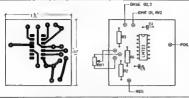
CIRCUIT BOARD AND COMPONENT LAYOUT
